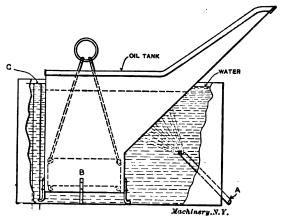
Oil Tank for Hardening Hack-saw Blades
